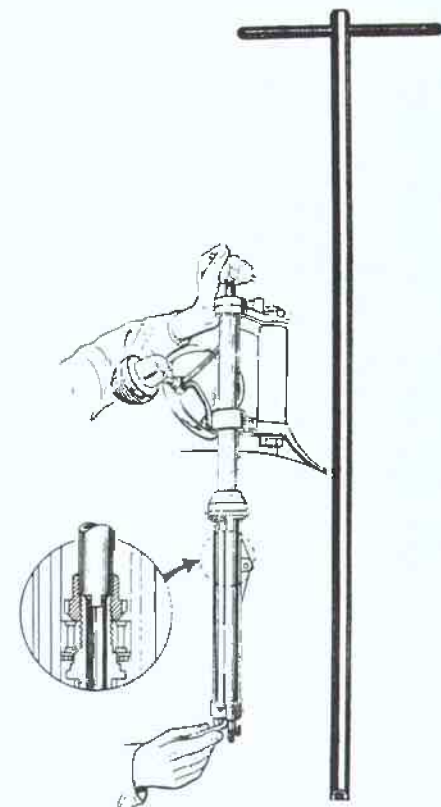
A—A special tool is helpful for holding the damper tube while removing screw.
